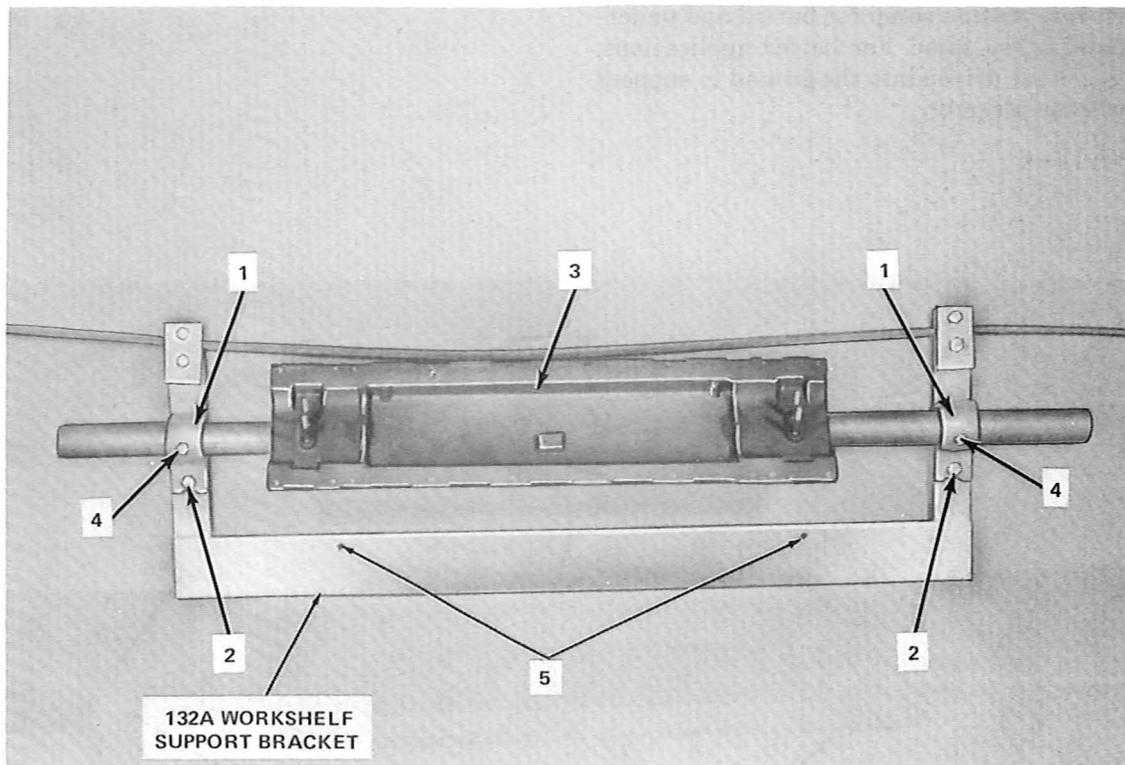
Installing Closure Base Assembly on 132A Work Shelf Support Bracket
